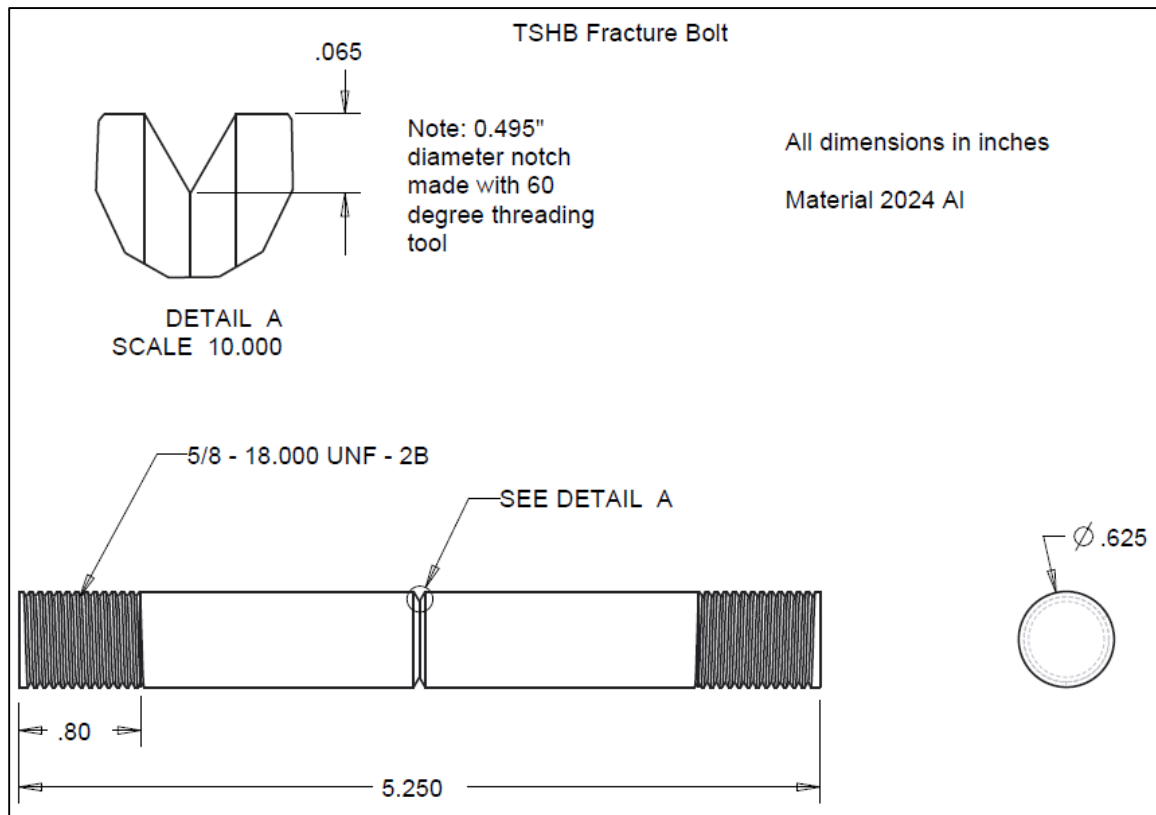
Manufacturing drawing of the TSHB fracture bolt.
